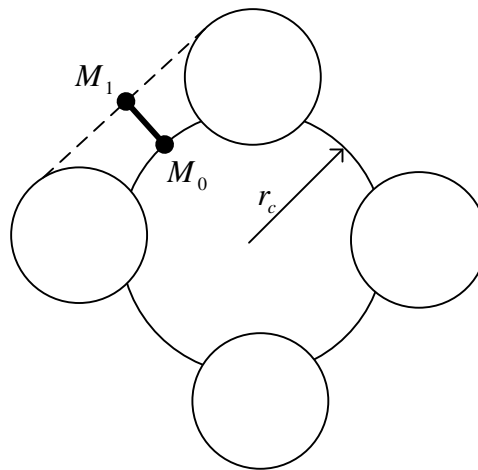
The section of the input part (gear) of a cylindrical transmission gear in an EC-gearing for $z_1 = 4$. The position of the profile cutter's axis and the tangent to the section circle of the first gear tooth perpendicular to the axis of the cutter is shown (dashed line).
